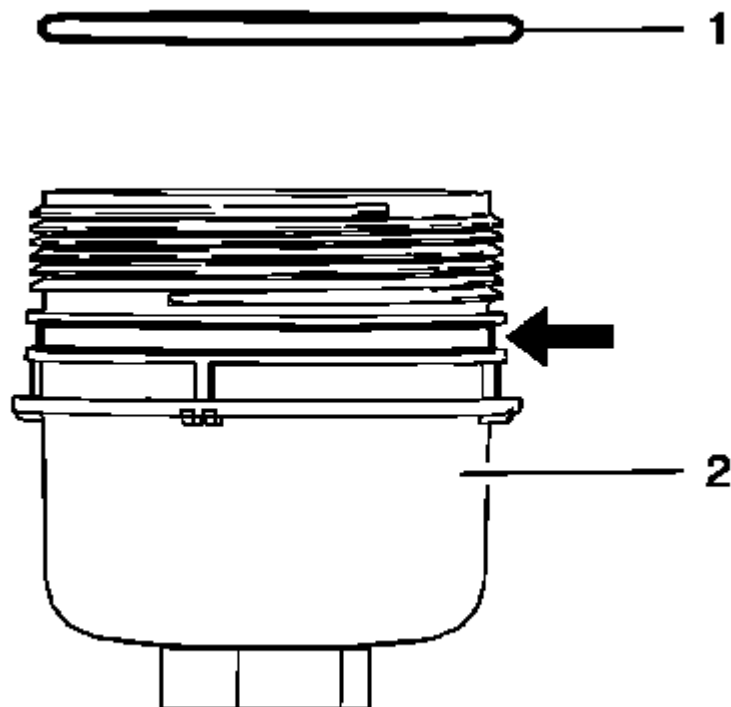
Oil Filter Cap, Oil Filter Element And Oil Filter Cap Seal Ring
